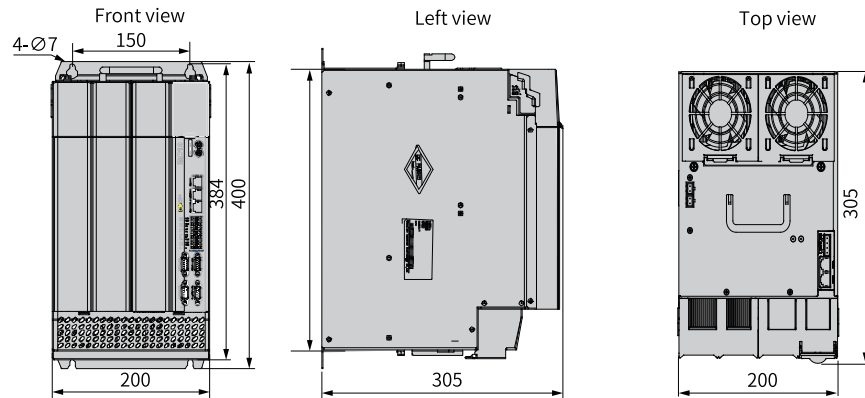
Outline dimensions of the size-2 (unit: mm)
